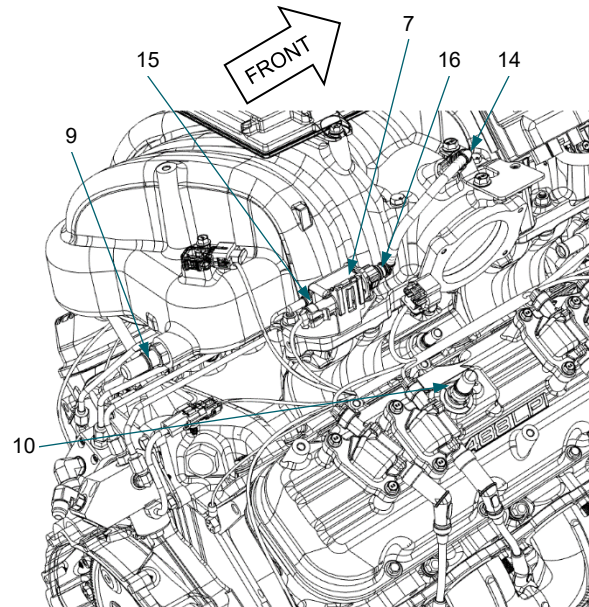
EVAP purge solenoid (7), purge solenoid to EVAP purge line location (15), purge solenoid fitting to intake location (16), purge line fitting (14) location on intake manifold.
